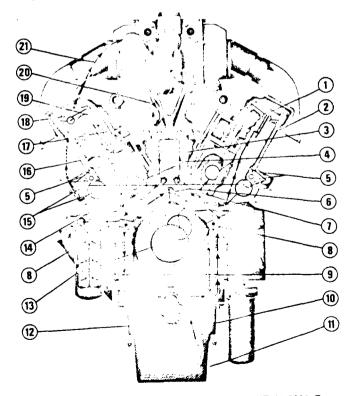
, (LWC-35). Front view standard lubricating oil flow -- KT(A)-2300 Engine
